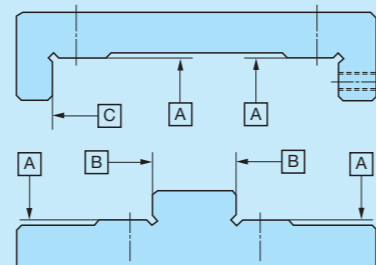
Example of processing of CRWG, CRWG...H and CRW mounting surface
